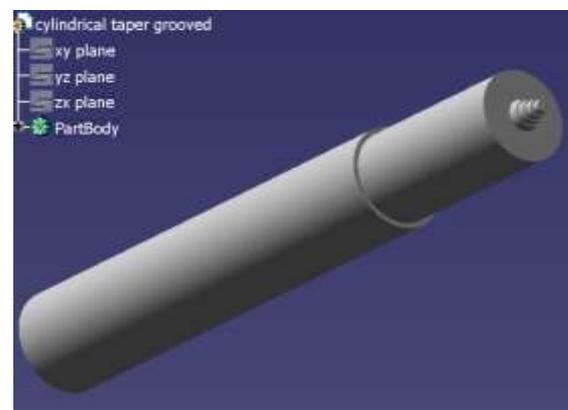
Tapered cylindrical grooved tool designed in CATIA
